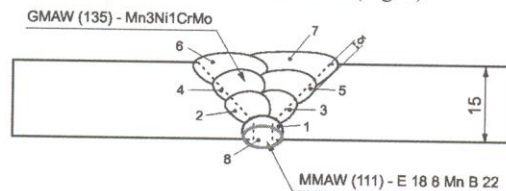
Combined MMAW/ GMAW deposition of weld layers
